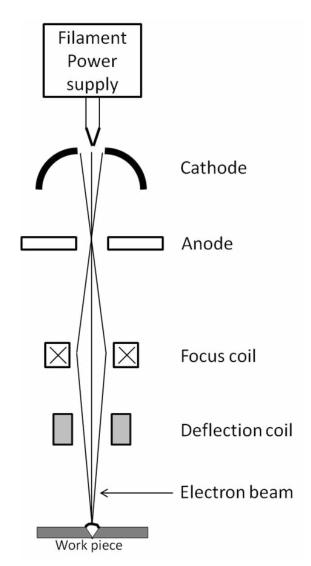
A principal illustration of an EB welding technique [10].
